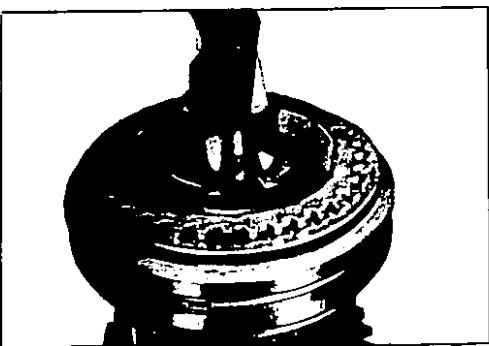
Removing the 2nd and 3rd speed synchronizer hub circlip.
